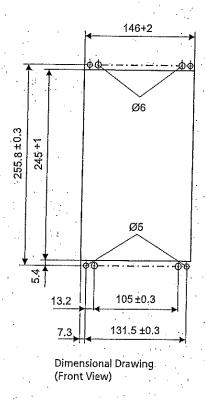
Dimensional drawing for SIPROTEC 7SJ66 (housing size 1/3)
